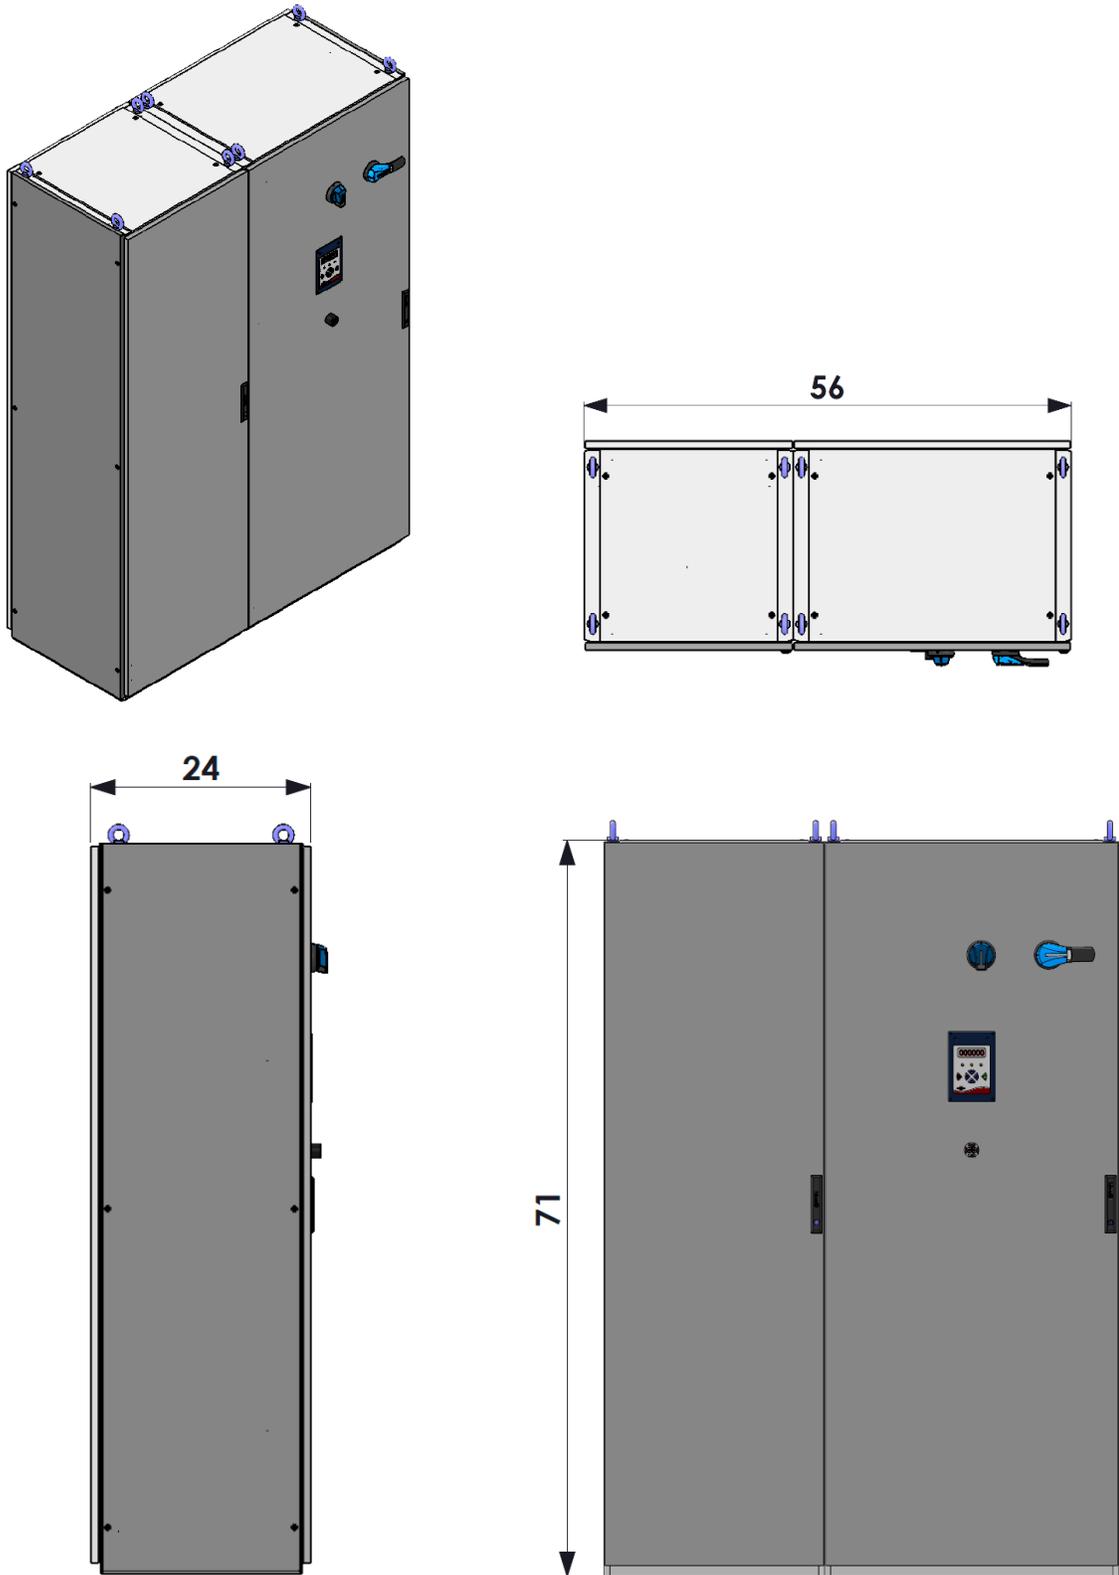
150KW-200KW Cabinet Dimensional Outline
